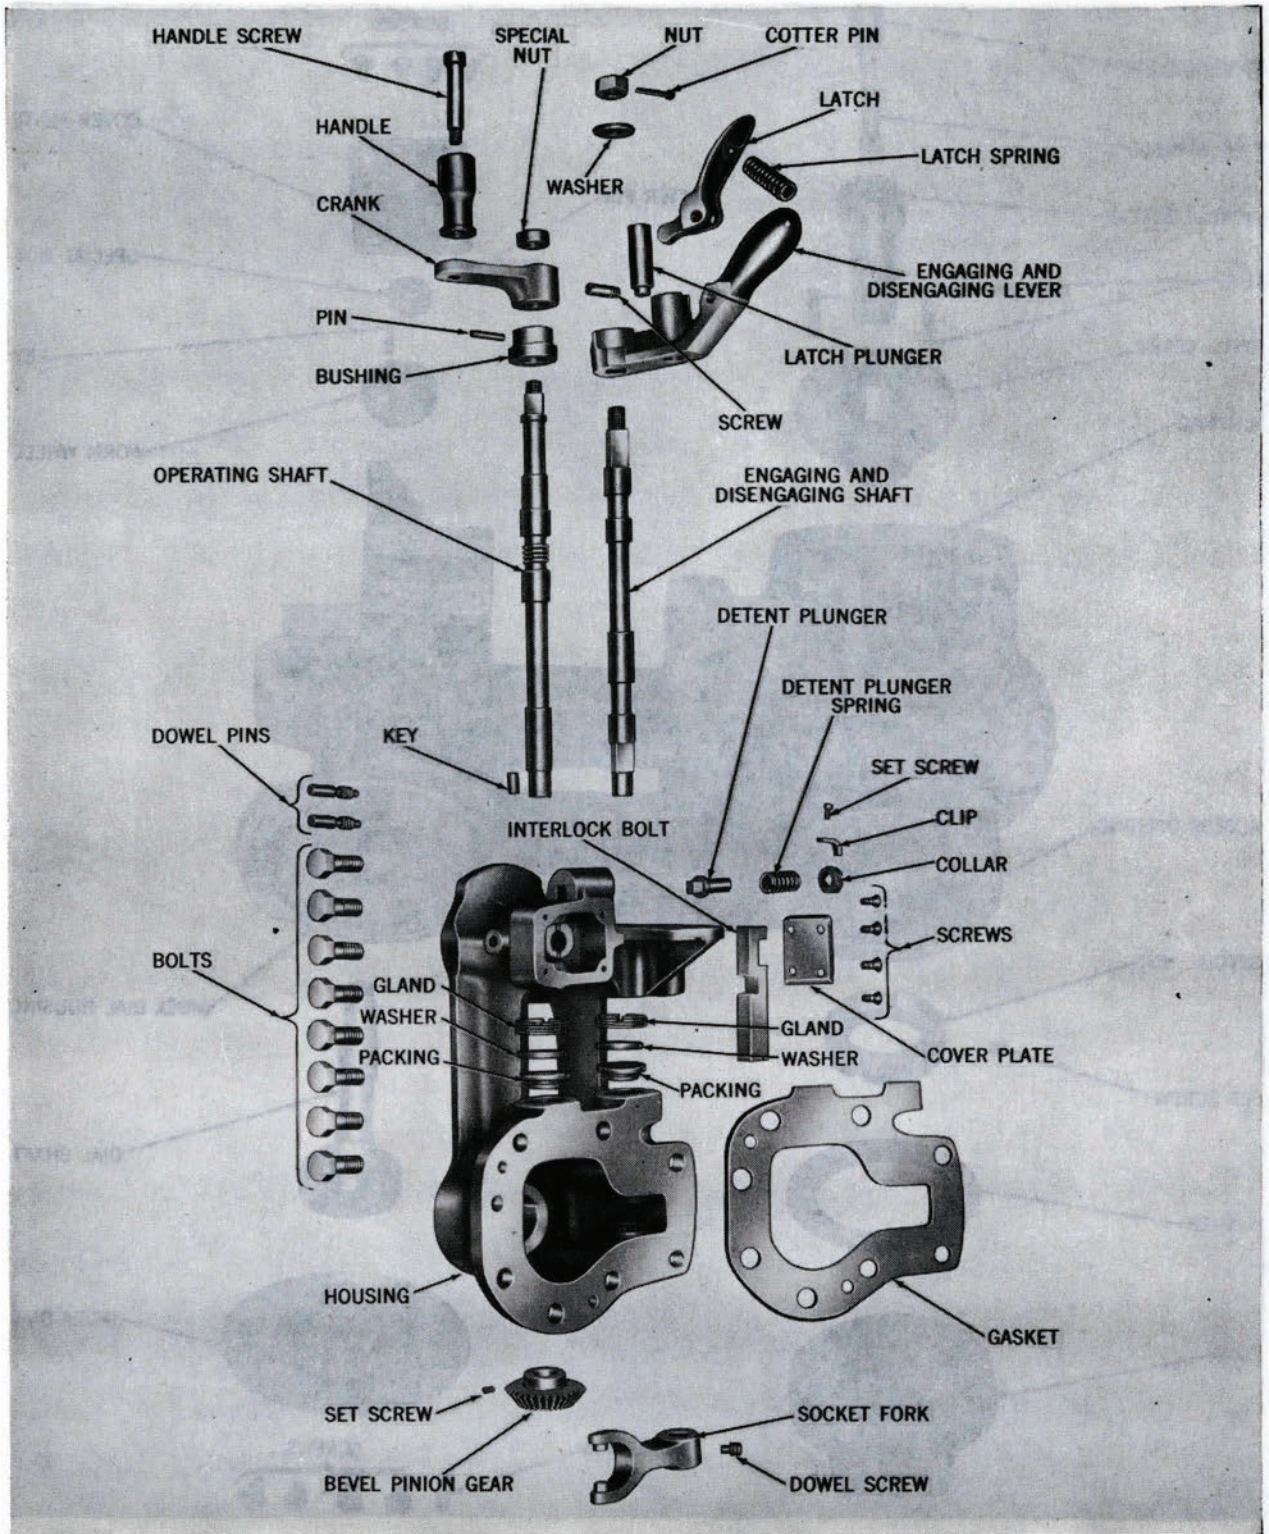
Depth Setting Mechanism Horizontal Assembly Parts.
